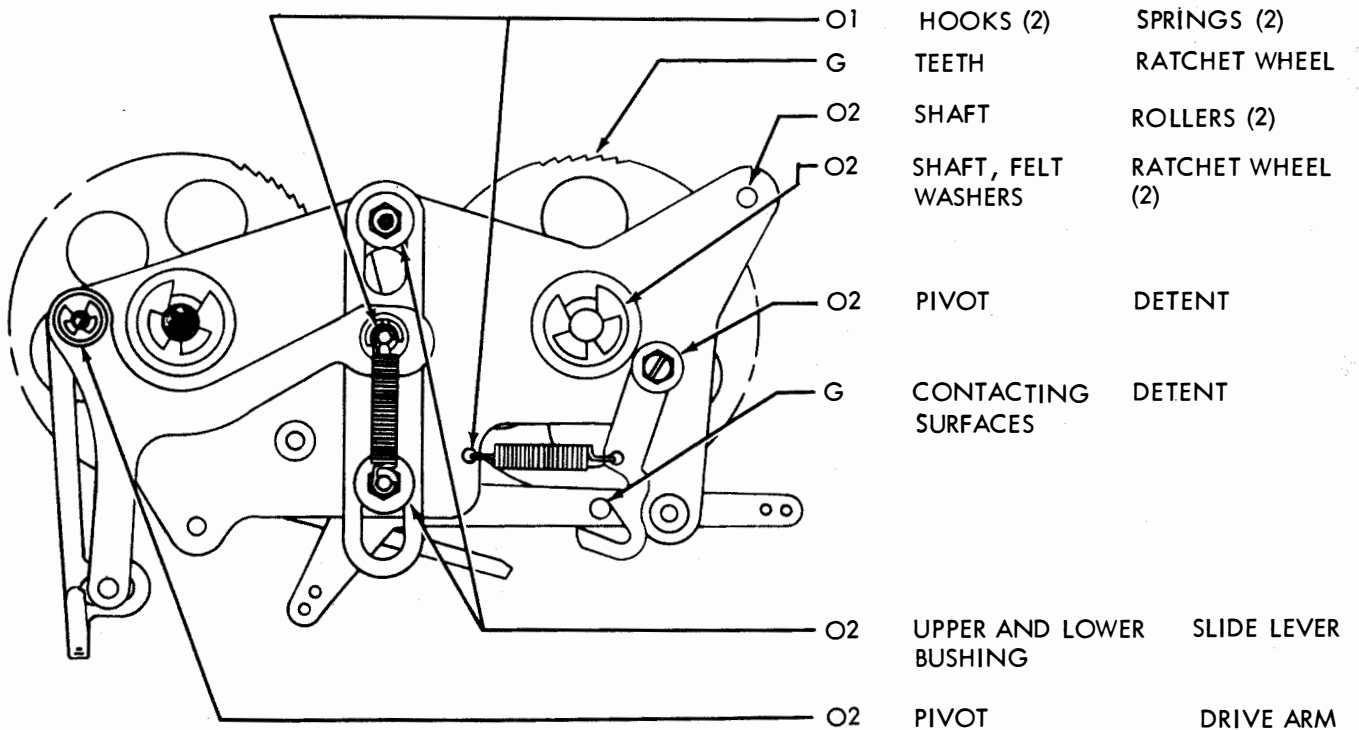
Ribbon-Feed Mechanism (Late Design), Rear View
